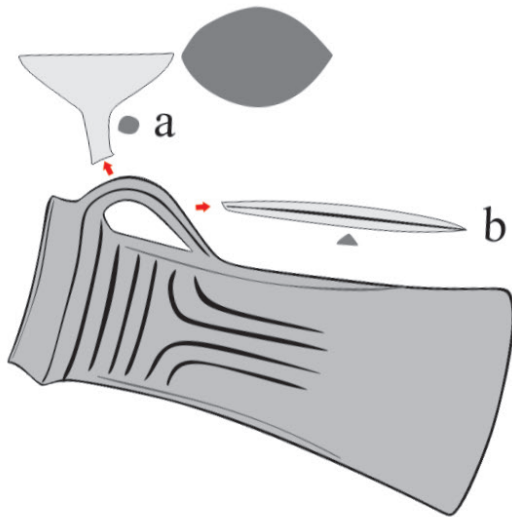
The reconstruction of the socketed axe that was cast in Mould no. 2; a: casting jet on the loop and the direction of casting; b: riser (drawing: J. G. Tarbay)
